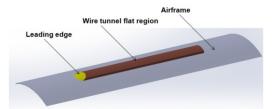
Front segment of the wire tunnel assembly mounted on airframe
